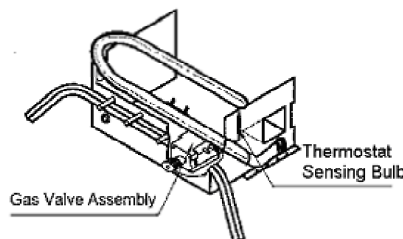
Location of Gas Valve Assembly and Thermostat Sensing Bulb
